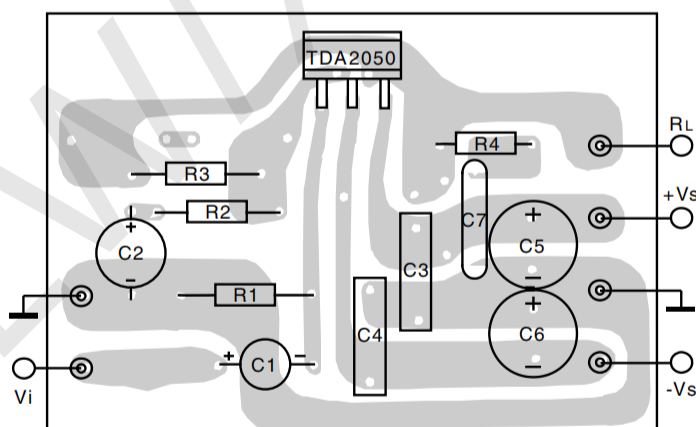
P.C. Board and Components Layout of the Circuit of Fig. 1 (1:1)
